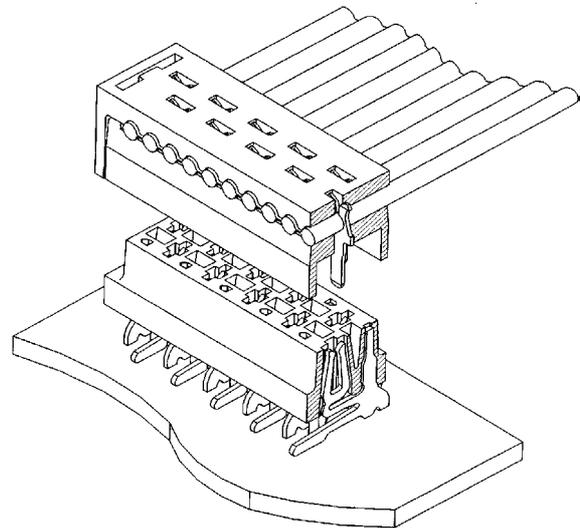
The Micro-MaTch™ surface mount version connects a ribbon-cable to a PCB.
